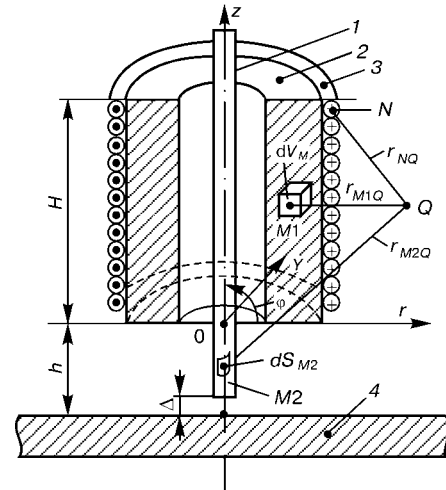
Schematic of a solenoid generating LMF: 1 — welding wire; 2 — core; 3 — coil turns (copper); 4 — workpiece
